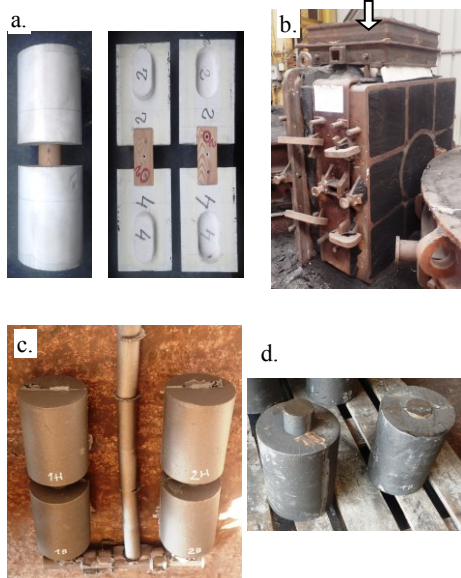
Stages of studies in industrial conditions: a – patterns ($\varnothing 200 \times 300$ mm) adjusted to molding without convergence on cylindrical surfaces of castings, b – a mold prepared for pouring (vertical mold joint), c – a raw casting removed from the mold, d – the casting after cut, prepared for NDT
